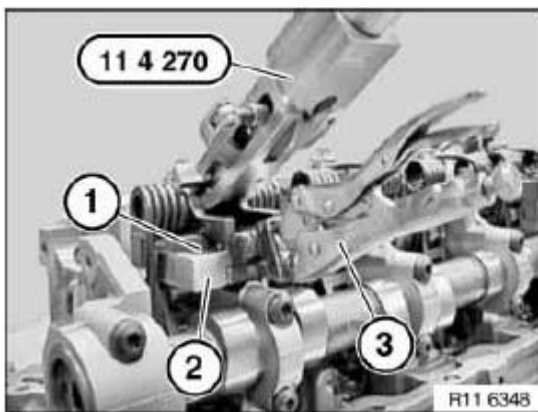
Identifying Special Tool (11 4 270), Gripping Pliers And Guide Block
